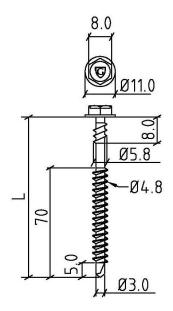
DBT(A)-S 4.8 Stainless-steel A4 screw for fixing in steel sheets (usable with automatic setting tool)
